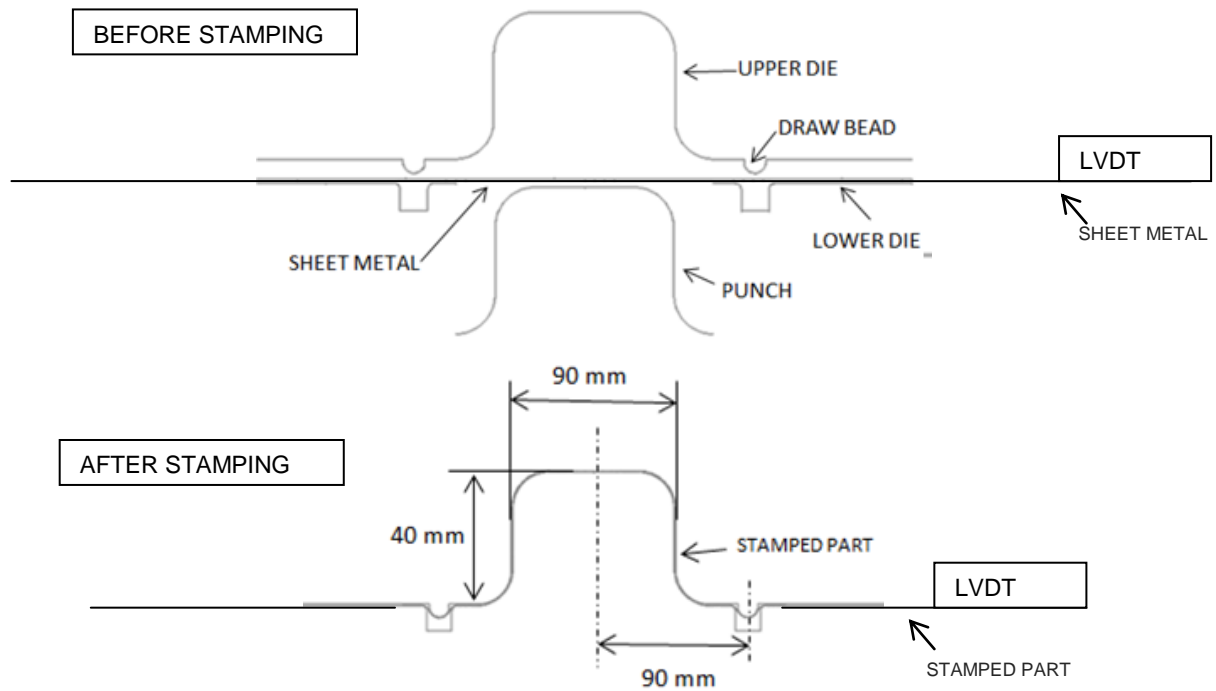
Stamping sketches: Tooling and stamped part. Sample width is 42 mm.
